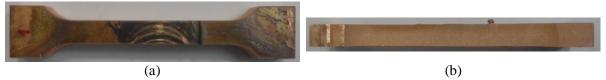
Specimen for tensile testing, y - direction normal to the welding direction; (a) on the upper side, (b) on the sides
